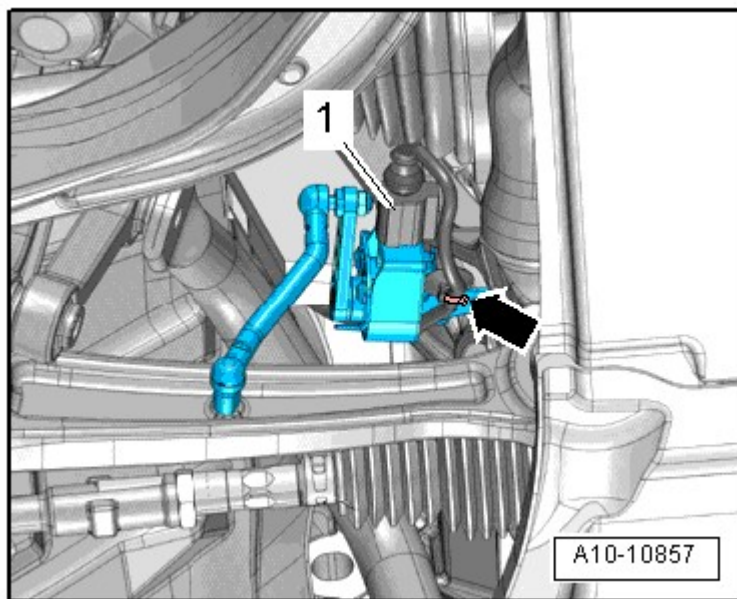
Disconnecting Electrical Connector On Left Front Level Control System Sensor
